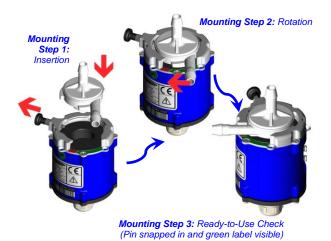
Intuitive 3-step pump head mounting procedure with bayonet type socket
